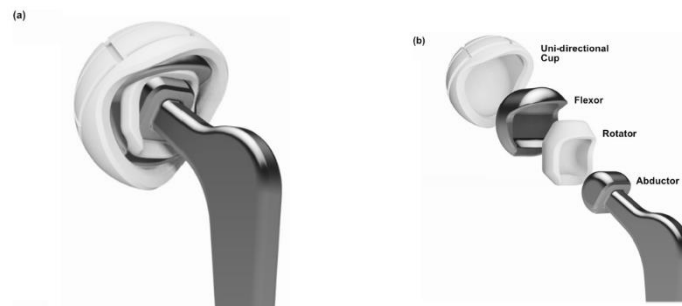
The hip implant developed in this work, showing (a) assembly view, and; (b) an exploded view with the components adopted nomenclature [34].
